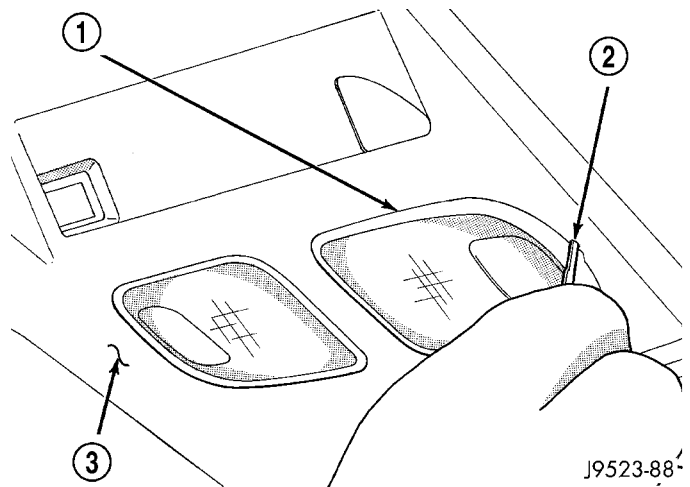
Overhead Console Reading Lamp Bulb Removal
